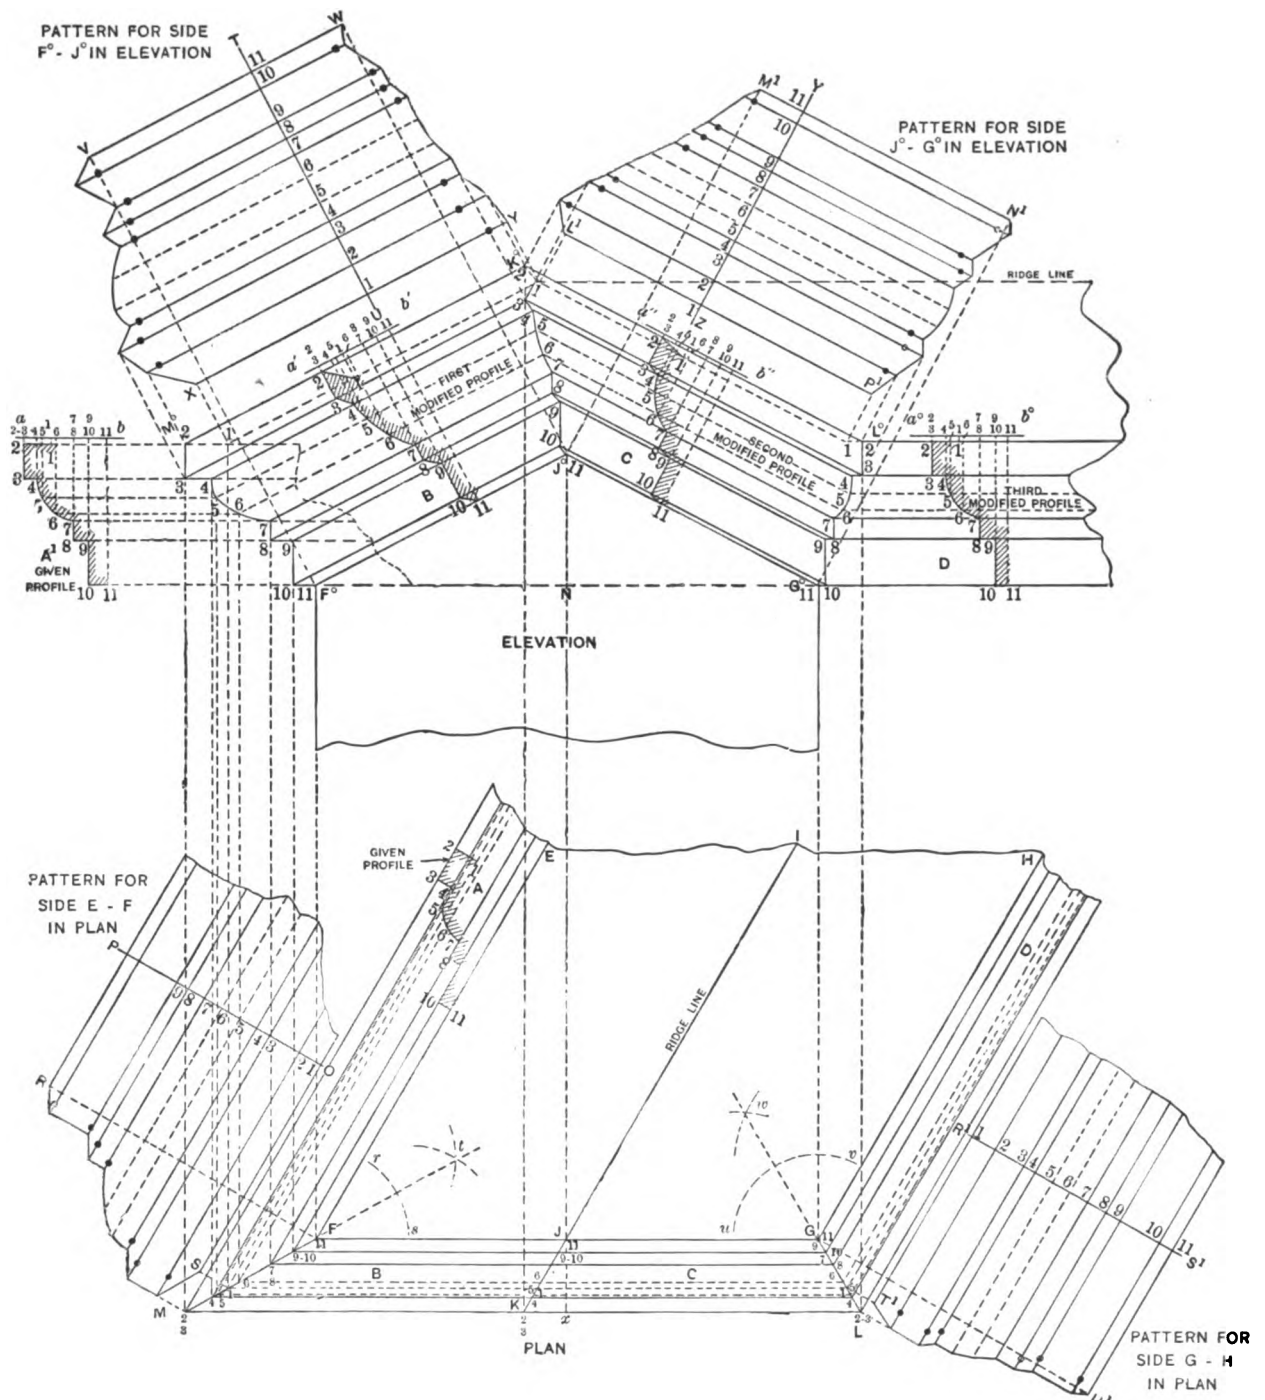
Drawings for Developing Patterns of Complicated Raking Moldings
